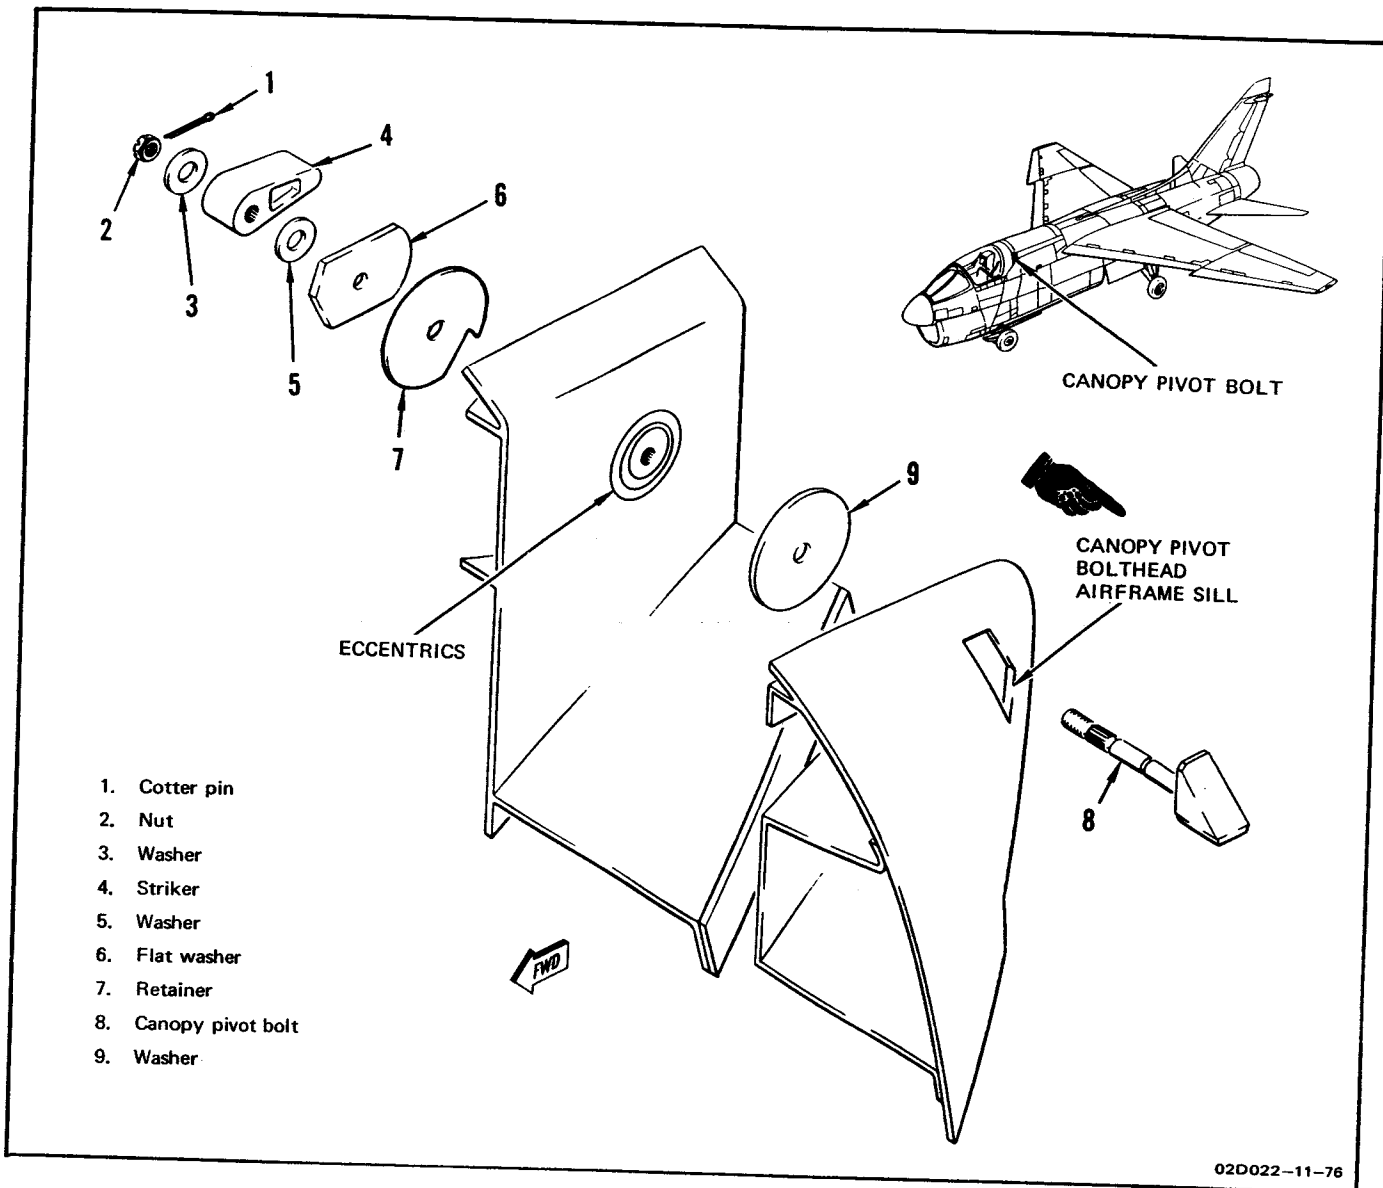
Canopy Pivot Bolt Removal and Installation
